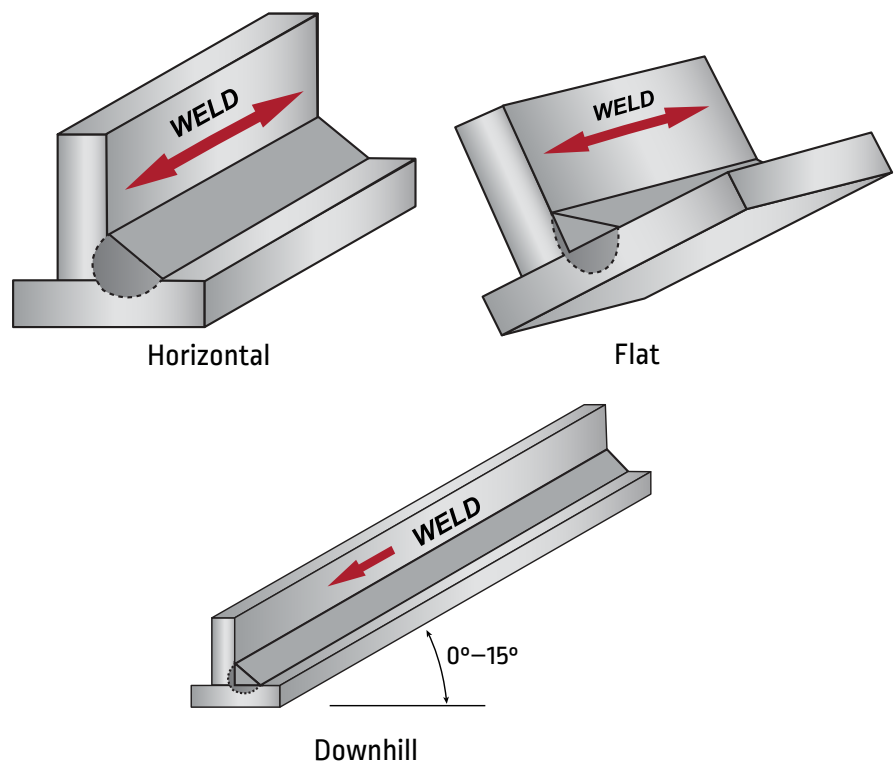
Horizontal, Flat and Downhill Welds
